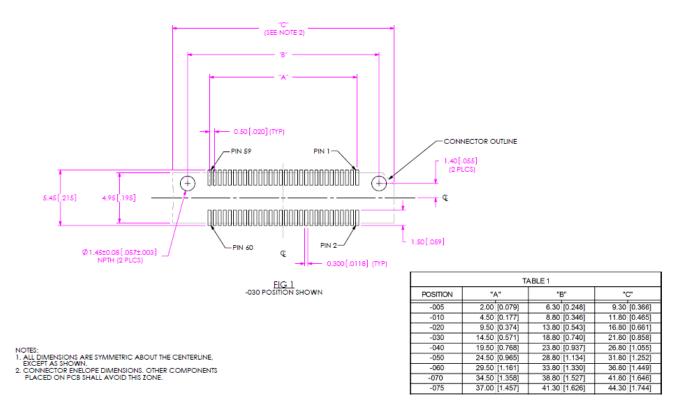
Samtec ERF5-060-05.0-L-DV-TR Recommended PCB Footprint
